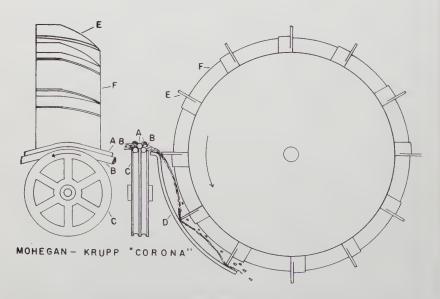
B. Detailed view of "first rotor" in Krupp-Corona unit showing the holding of the plants by the rope grip as the tops (or butts on the second wheel) pass between the breast plate and fast moving blades or beaters of the rotor.
